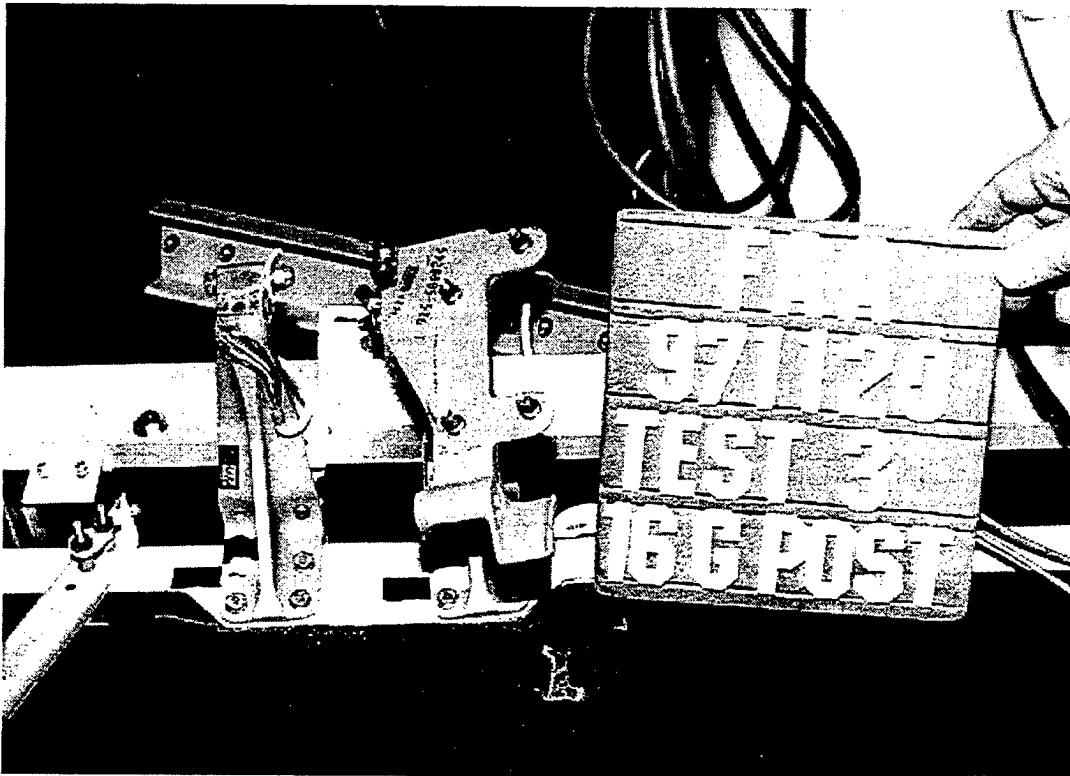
POSTTEST BIN A MID AND AFT LOWER SUPPORTS VIEW 3
